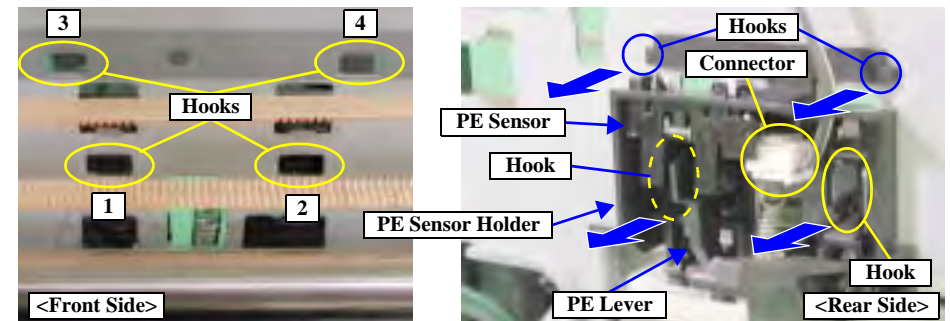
PE Sensor/PE Sensor Holder/PE Lever Removal 1
